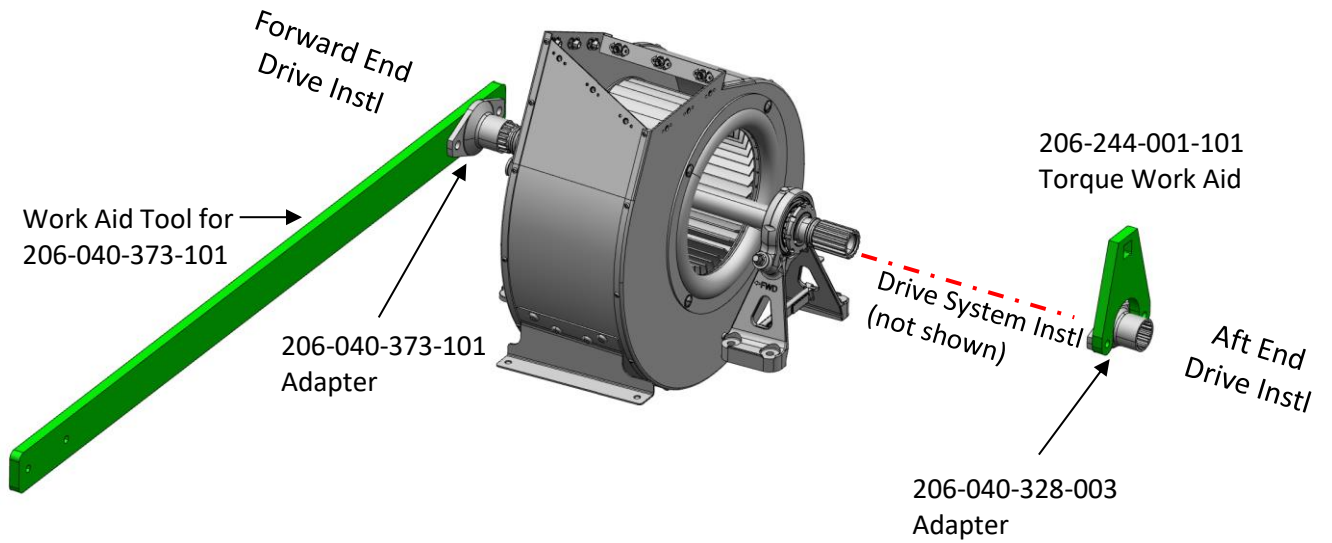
Bonded Shaft Tool (206-244-001-101)
